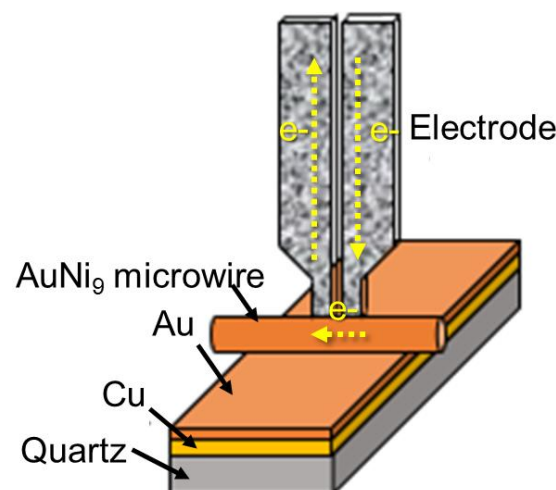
The welding installation and welding structure of an AuNi₉ microwire and Au microlayer.
